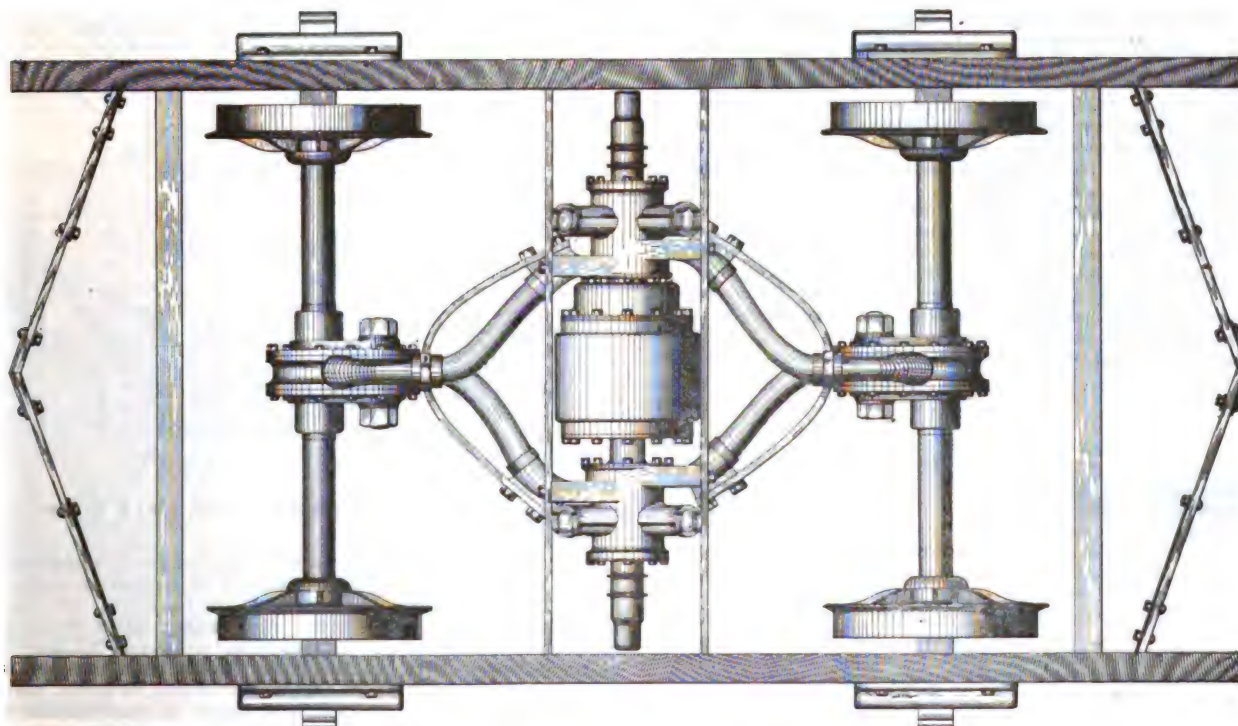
DEY-GRISWOLD SYSTEM.—PLAN VIEW OF MOTOR AND HYDRAULIC MECHANISM.
